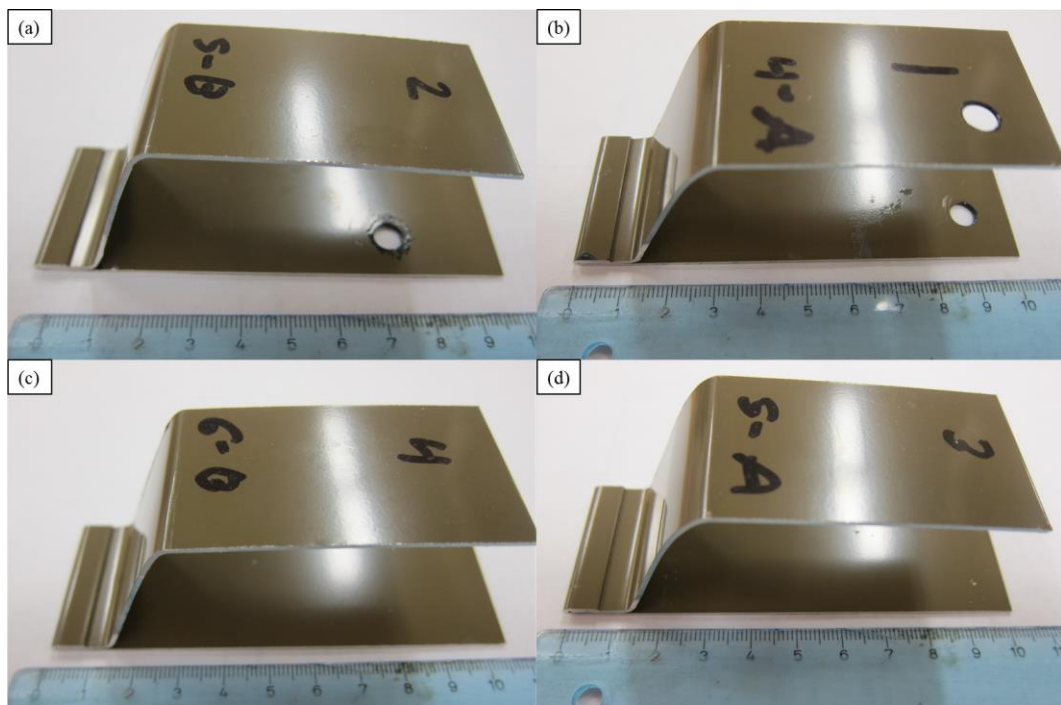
Photographs of hem flange coupons (a) AA6022 and (b) AA6111 after six-week Ford L-3190 cyclic corrosion exposure; (c) AA6022 and (d) AA6111 after twelve-week Ford L-3190 cyclic corrosion exposure.
